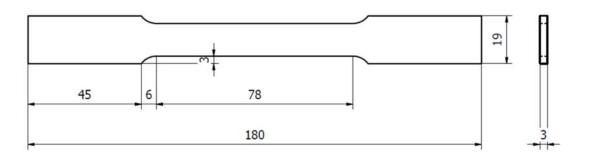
Dimensions of the tensile test specimen in Millimeters (mm).
